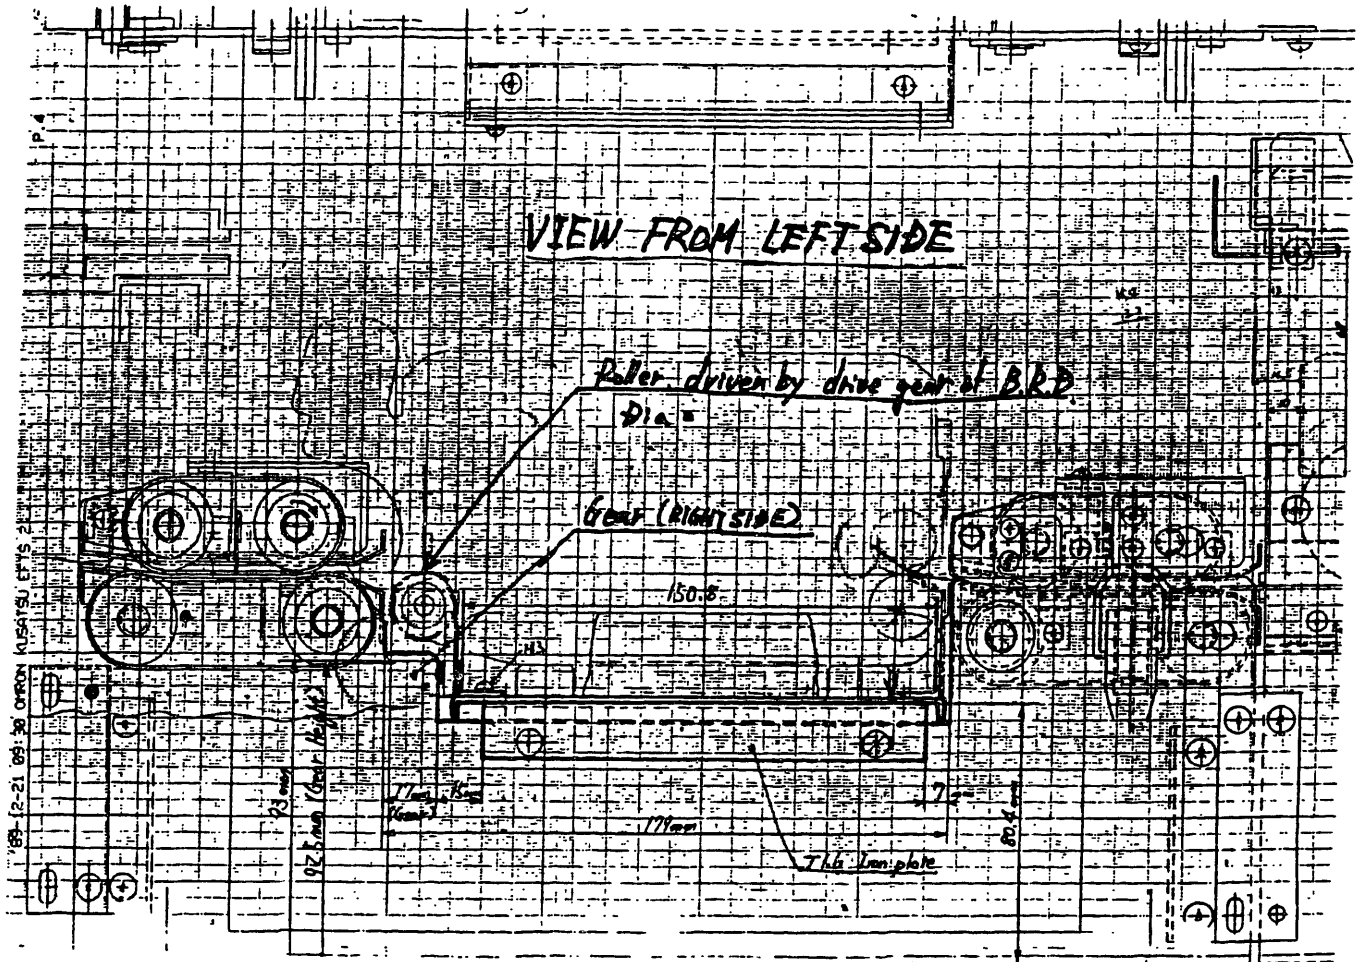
Side view drawing of the BRD test apparatus [Omron 90]
